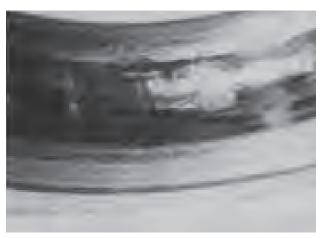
Seizure on Outer Ring Raceway of Deep Groove Ball Bearing
